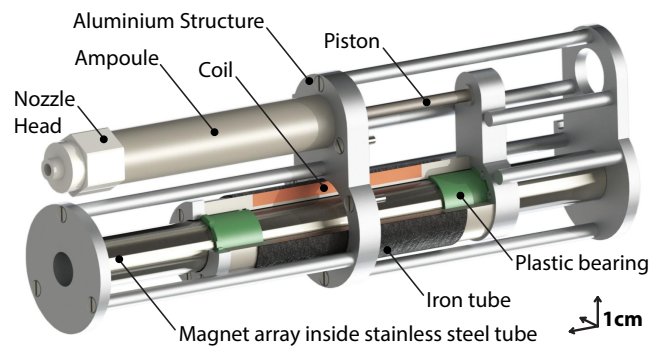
Cut-away view of the optimized motor and jet injector design, showing the bobbin and coil riding on linear plastic bearings along the magnet array, as well as the supporting structure, piston, and drug ampoule.
